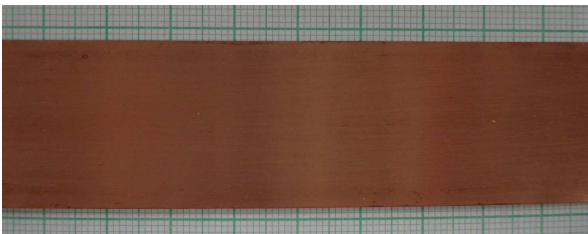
A 1 inch wide strip is cut off the flexible circuit board. Onto this strip the printed circuit shown in Fig. D.1 will be transferred with an iron.
